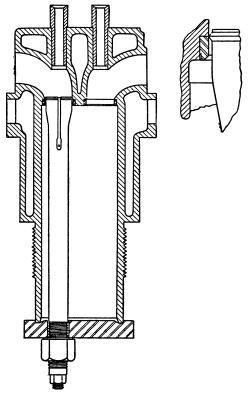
Tool Position for Removing Valve Seat Inserts
